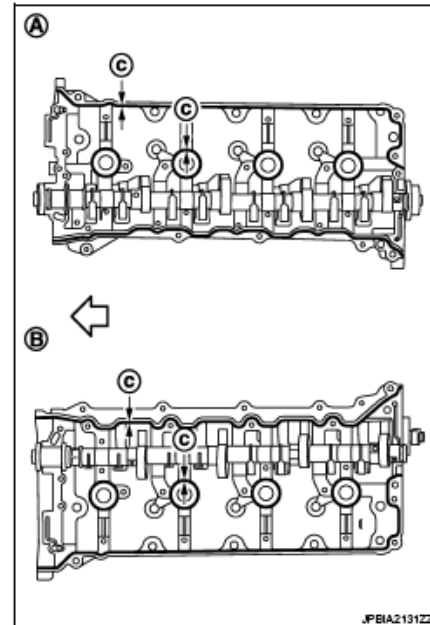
Identifying Cylinder Head Liquid Gasket Area
